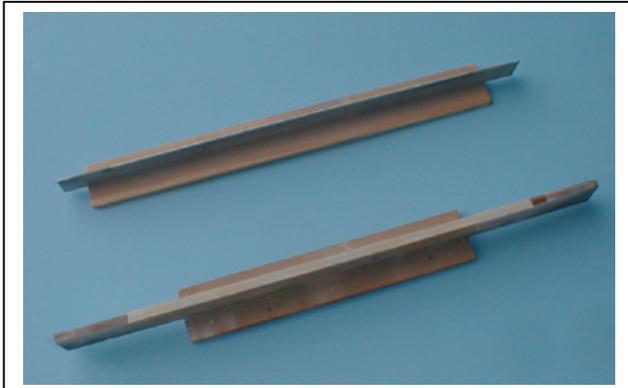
Painting jigs. Top jig uses the thin aluminum bar stock and bottom jig uses the 1/4" wood lattice.
